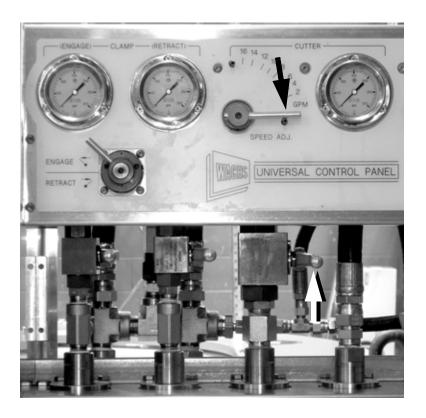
When the cut is complete, set the cutting speed lever back to 0. Then return the cutting drive lever to the off (up) position.
